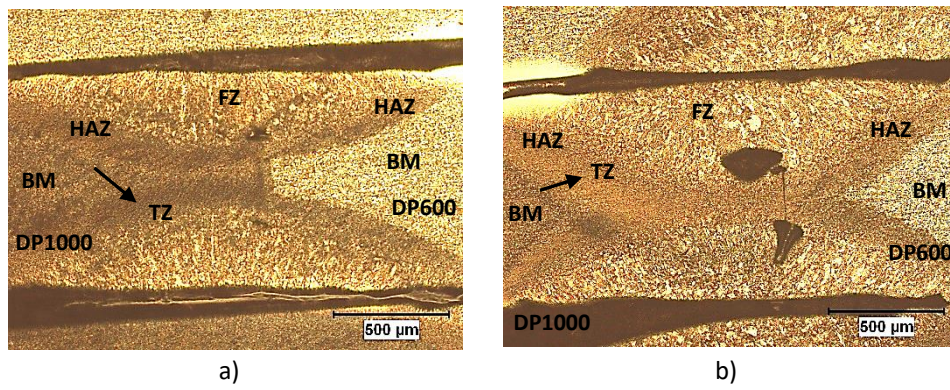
Typical macro images of welded joints: a) 4 Hz; b) 6.5 Hz (FZ: Fusion Zone; HAZ: Heat Affected Zone; BM: Base Metal; TZ: Transition Zone).
